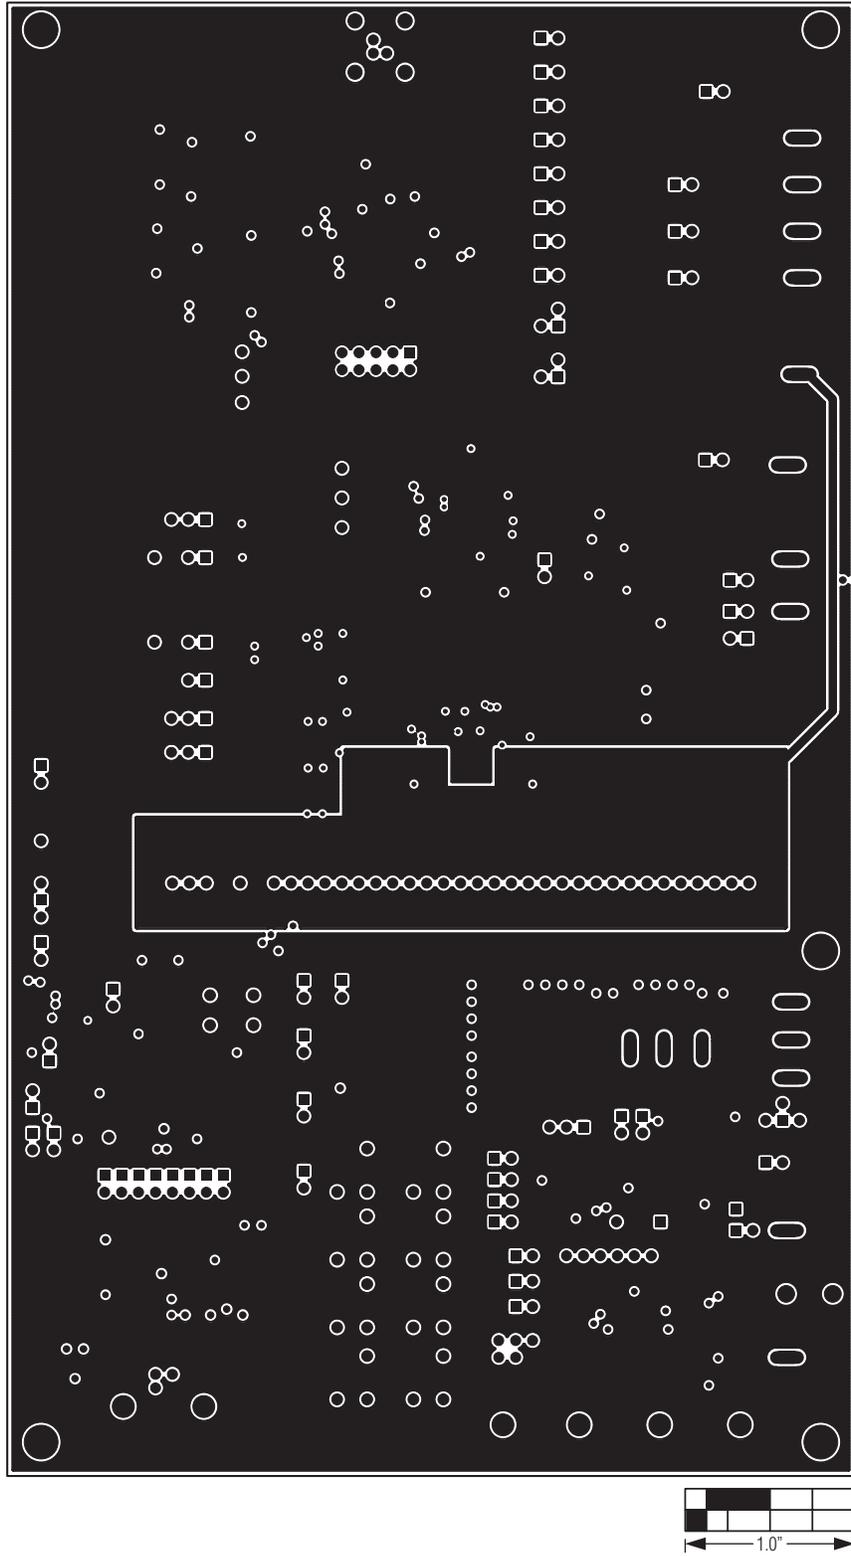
MAX9266 EV Kit PCB Layout—Ground Layer 2
